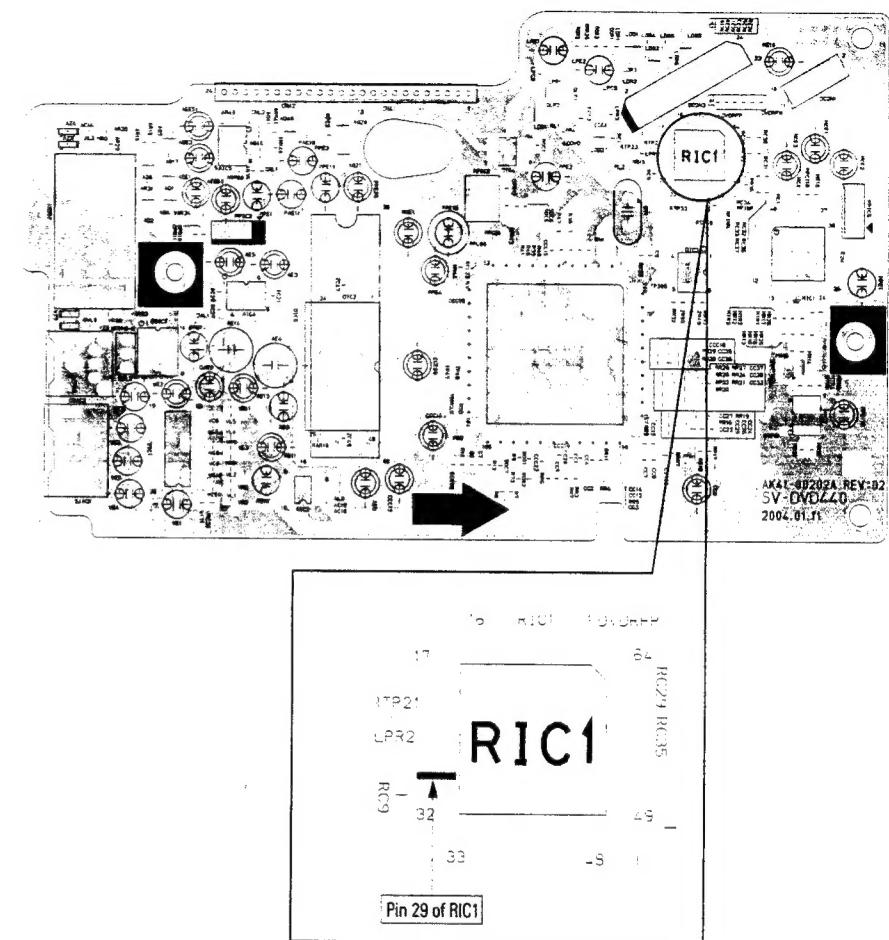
Location of test Point (Main PCB - Top Side)
